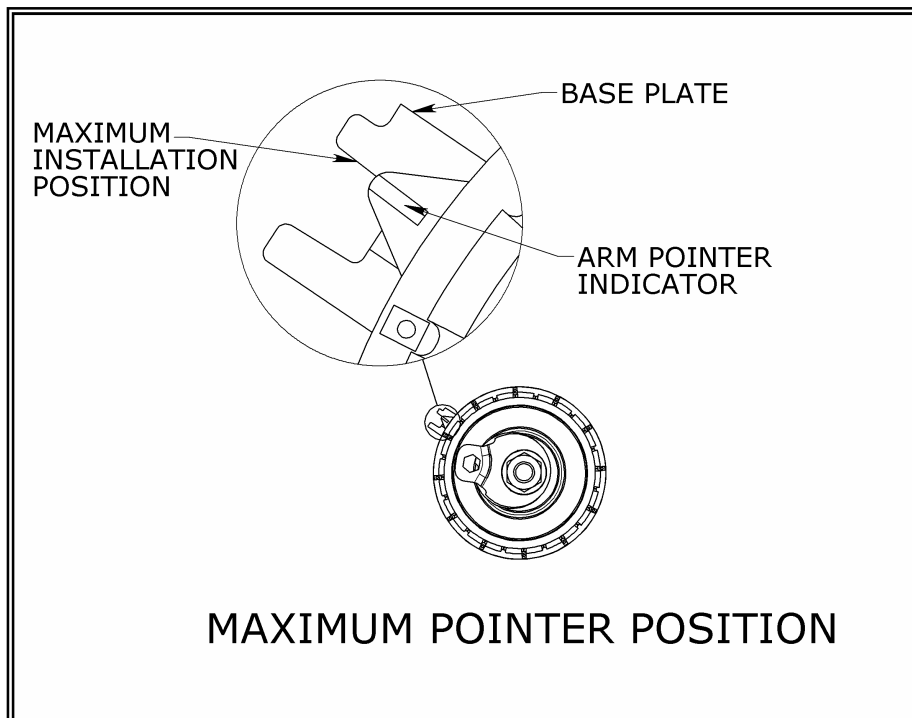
The Arm Pointer adjusted at the MAXIMUM Installation Position
